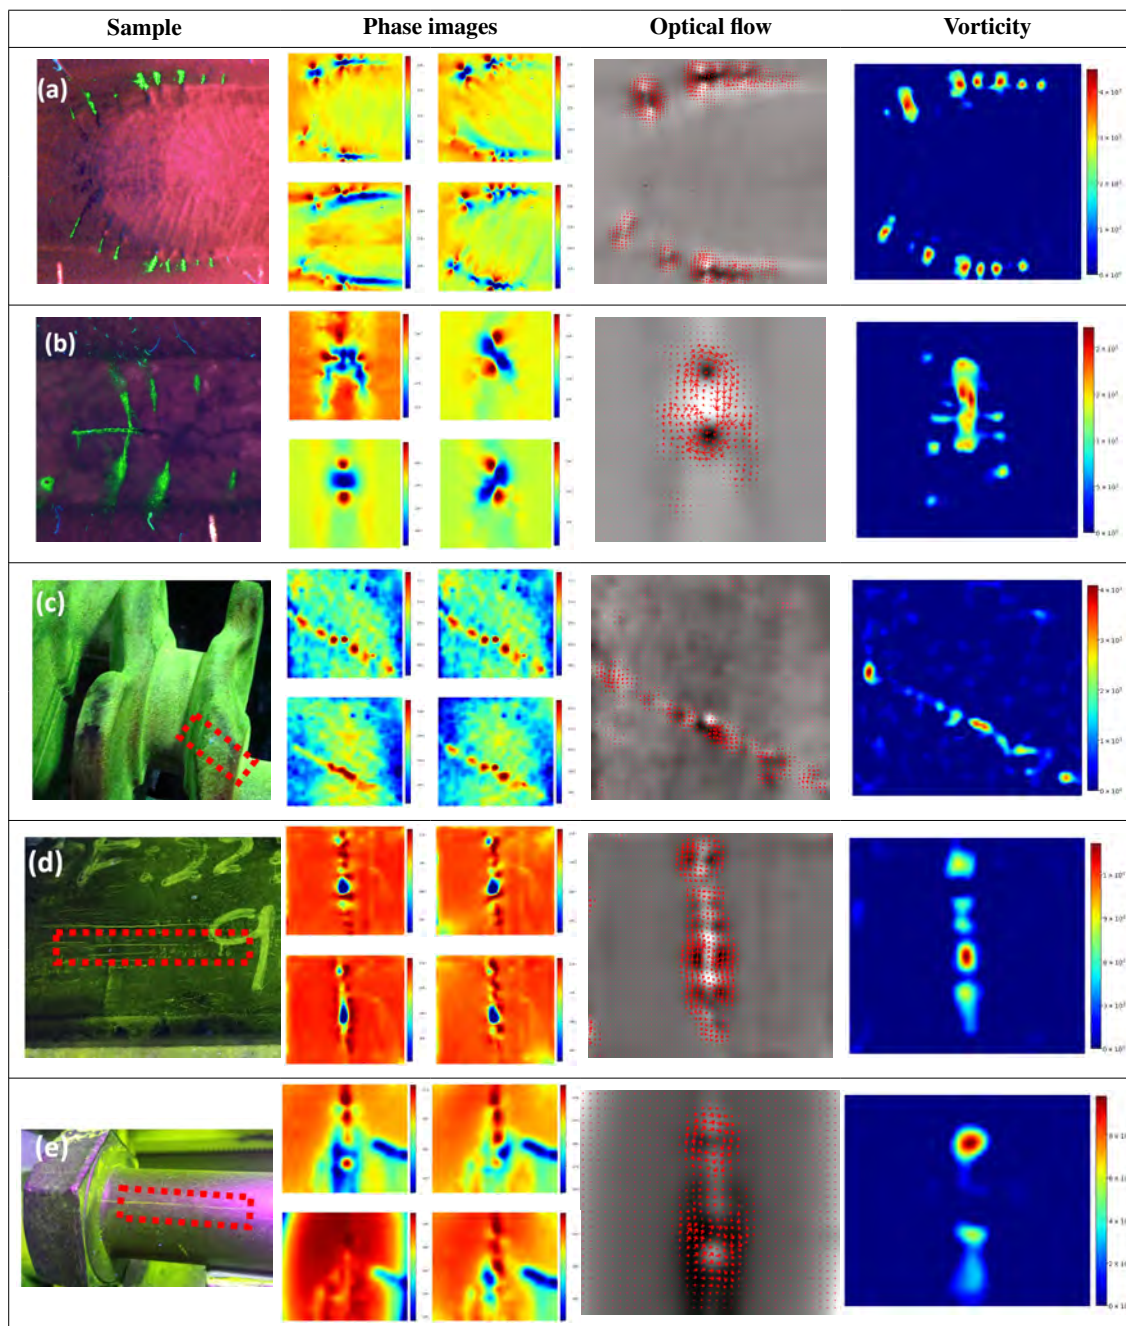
Natural weld crack detection. The first column displays the samples with the enhanced LPI for TIG inconel (a) and a laser inconel 718 (b), and a MPI for (c) forged steel crankshaft, (d) steel billet and (e) forged steel bolt. The remaining columns displays the multi-directional phase images, the optical flow, as well as the vorticity with a positive truncation.
